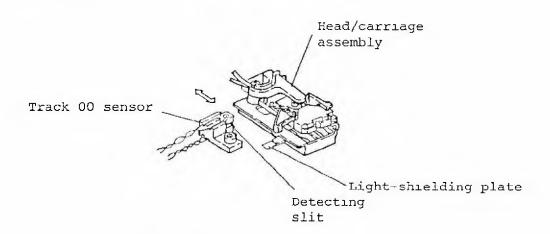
Track 00 Sensor and Head/Carriage Assembly
